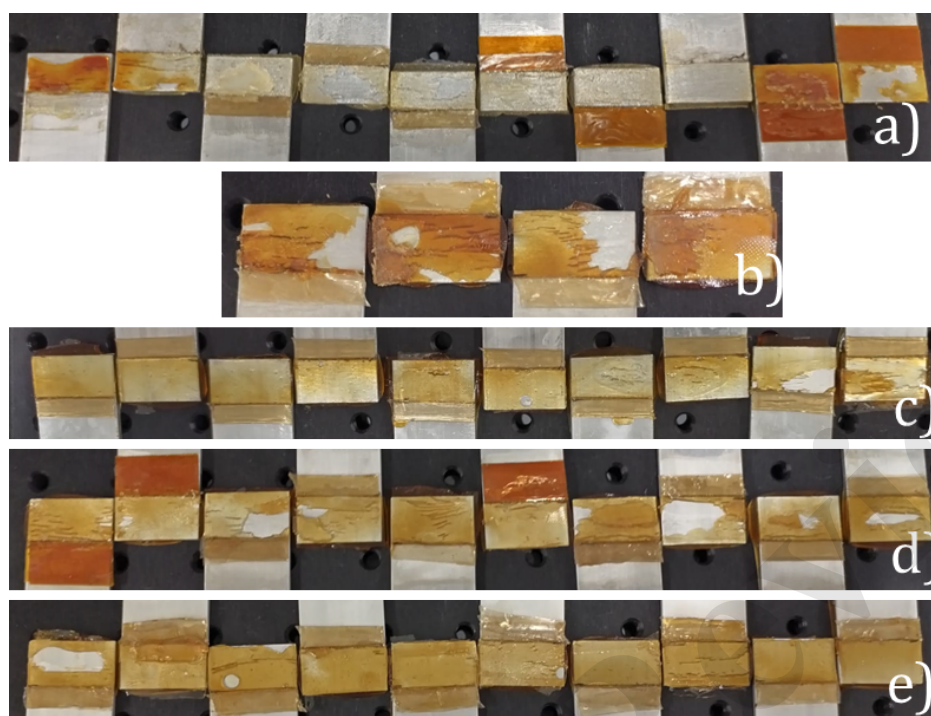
Failure surfaces of the adhesion after self-welding samples for all treatments showing a mostly cohesive failure. a) T2-deg-abr; b) T4-pla-5-abr; c) T6-chem-No3, d) T7-chem-alkUS and e) T8-chem-P2.
